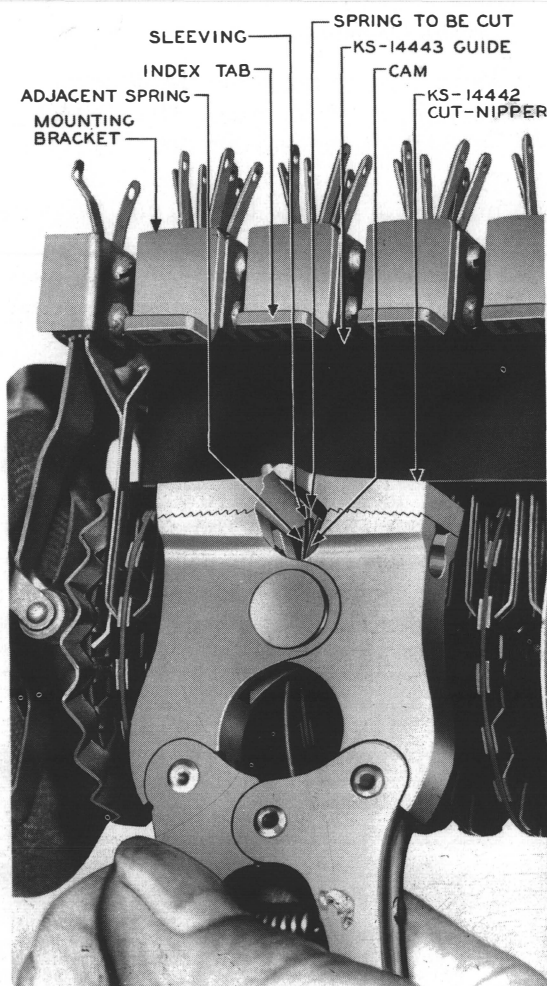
Method of Cutting Worn Outer Spring Tips
